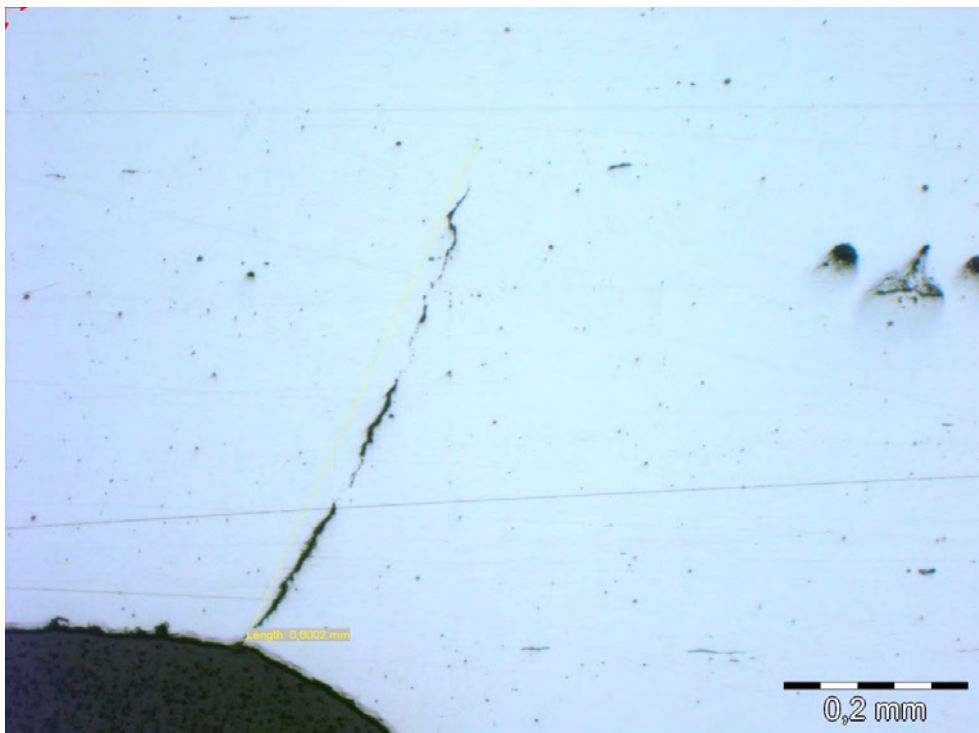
Crack at segment B, first ridge on barrel no. 1393 (second cut)
